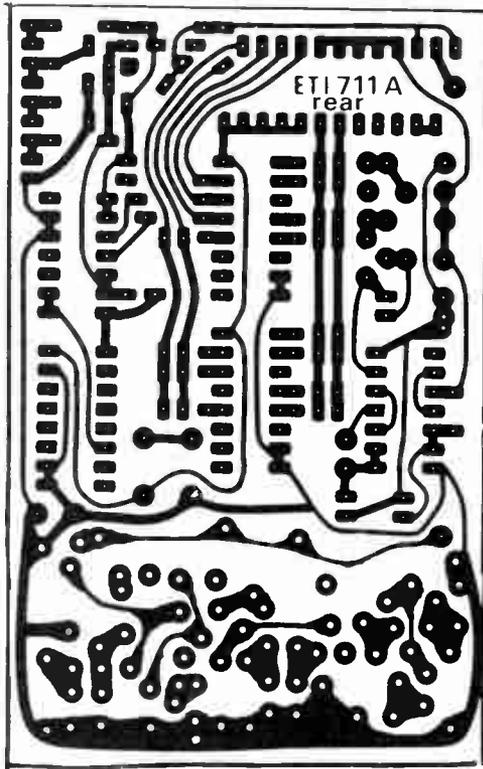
Printed circuit layout for the rear side of the transmitter board. Full size 100 x 62mm
